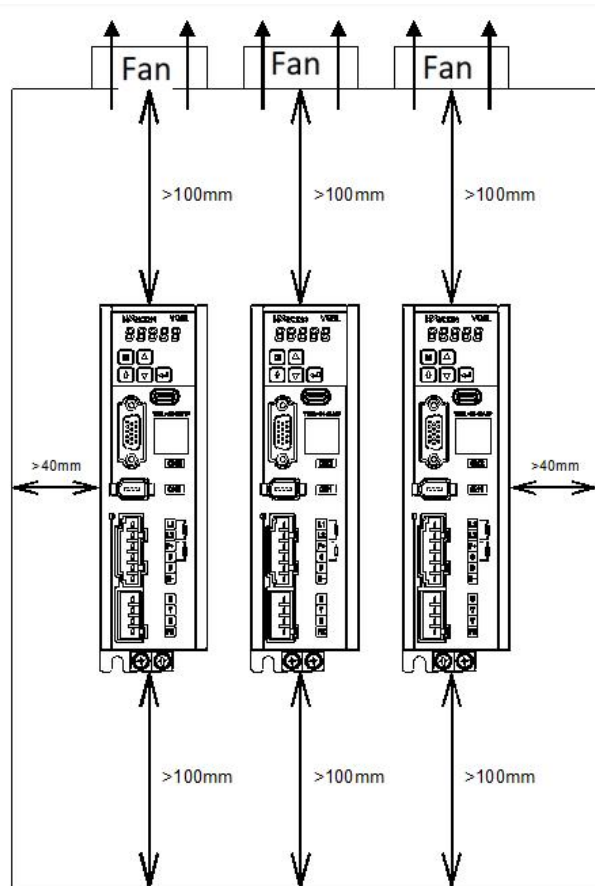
Mounting dimensions for multiple VD5L drives in parallel
